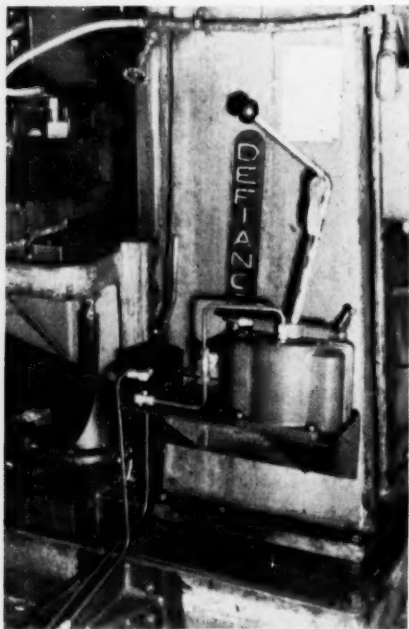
The controls (hand pump, four-way-valve, and relief valve) are mounted on the stationary drill press. Heavy copper tubing is used for all hydraulic connections.
